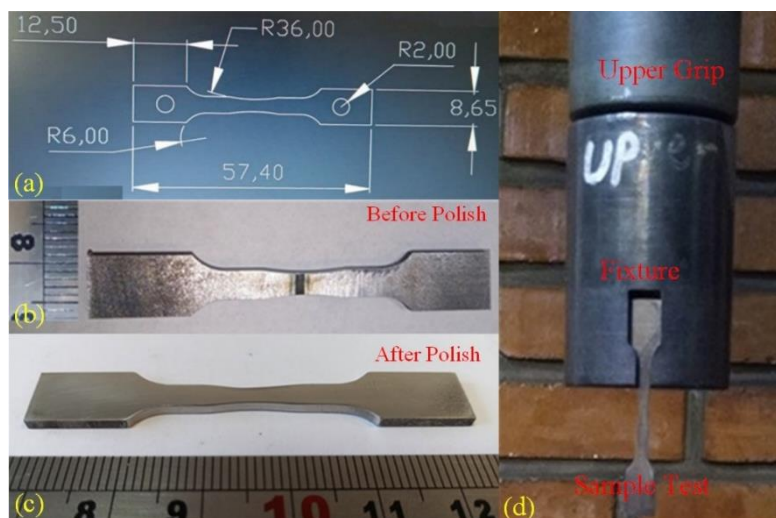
a) Dimensions of the fatigue specimen, b) welded fatigue sample, c) polished fatigue sample, and d) fixture for fatigue testing
